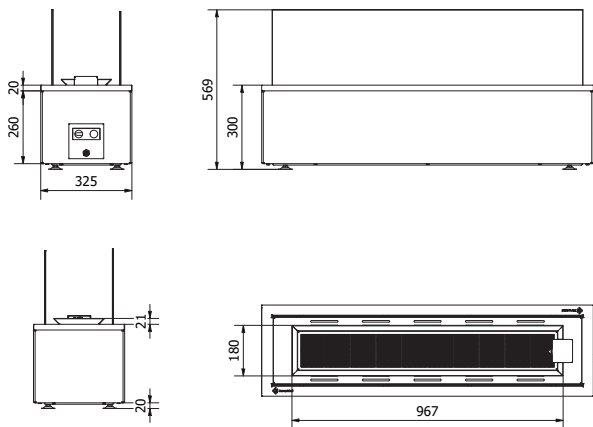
Dimensional drawing of the PATIO HORIZONTAL
